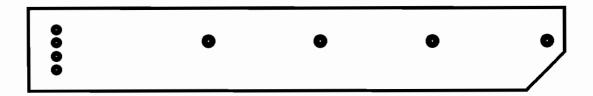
A17 CONNECTOR PC Board Parts Layout 31
